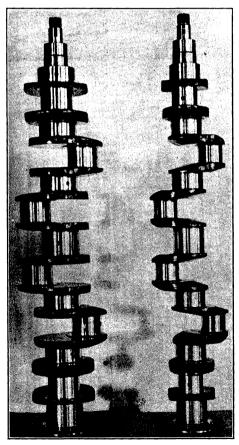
Diesel and Gasoline Engine Crankshaft.
